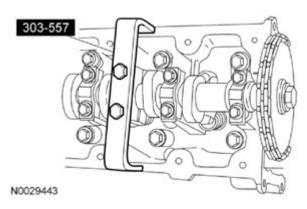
Installing/Removing Camshaft Position Aligners On Camshafts Courtesy of FORD MOTOR CO.
